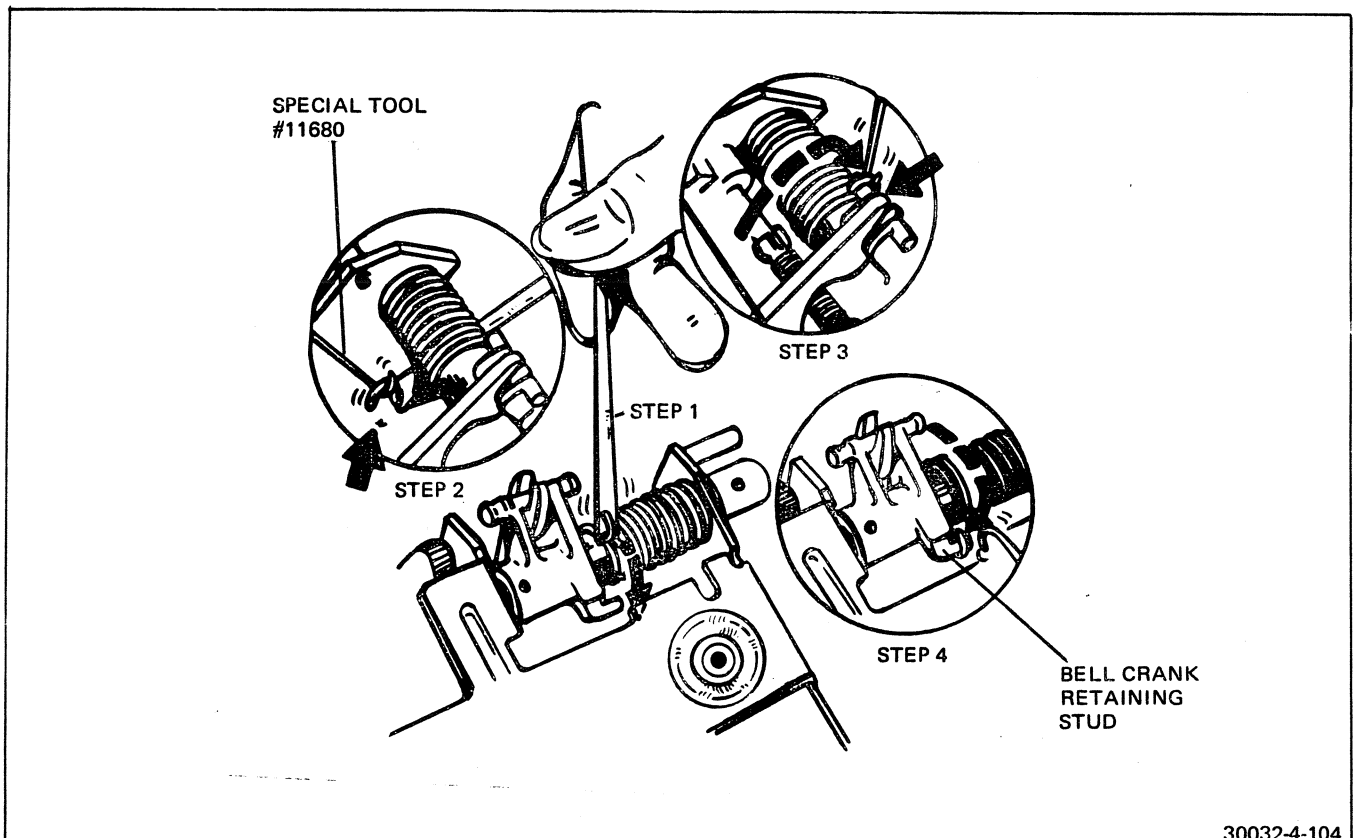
TENSIONING THE FRESNEL DRIVE SPRING
